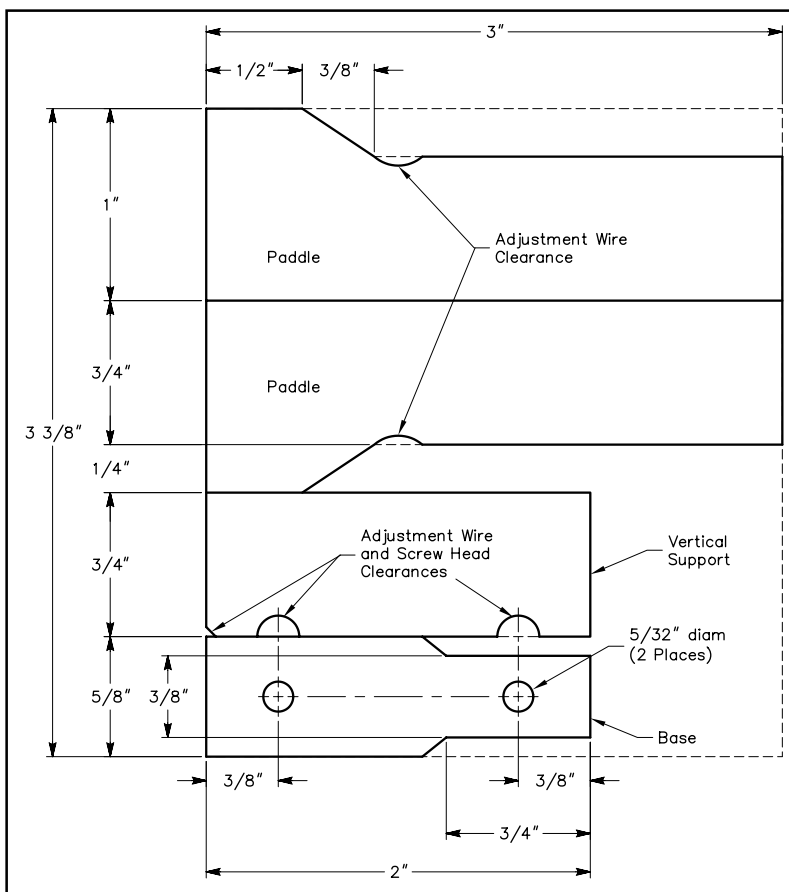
Patterns for both paddles, the vertical support and the base. You can cut PC board stock to the dimensions shown, or photocopy this page, cut out the patterns and use them as cutting templates.
